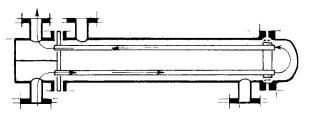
Outside Packed Lantern Ring Floating Head Exchanger. (COURTESY OF PATTERSON-KELLEY CO.)
